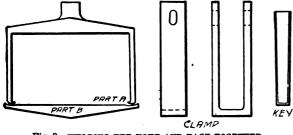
WELDING THE YOKE AND BACK TOGETHER.
